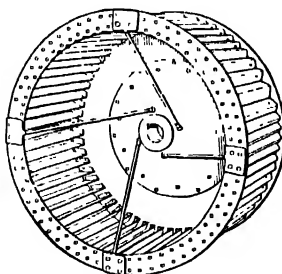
"Sirocco" Wheel Turbine Type Impeller.
